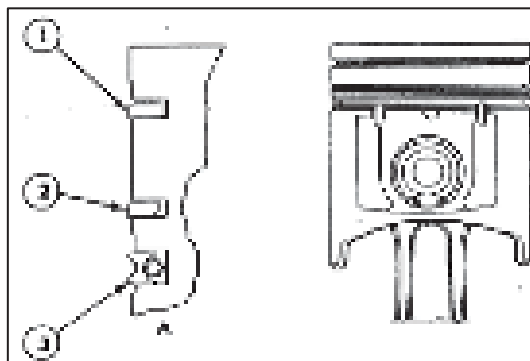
Piston Ring Assembly with Re-entrant Combustion Chamber & Side Oil Drain
